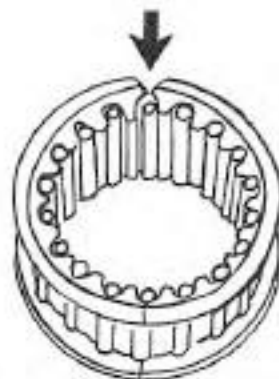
Connecting rod bearing cages have one ground corner as indicated by arrow. Ground corners must be matched during assembly.
